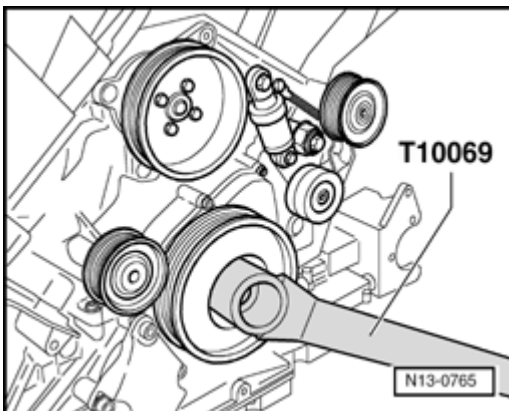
Loosening/Tightening Securing Bolt, Lock Vibration Damper Using Counter-Holder Tool T10069
